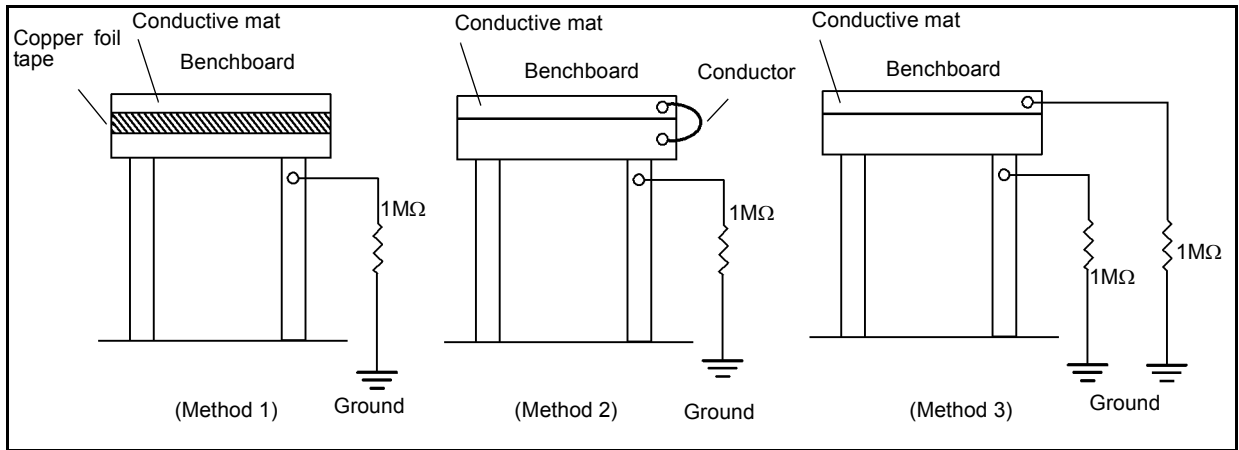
Countermeasures for Static Electricity of Work Bench
